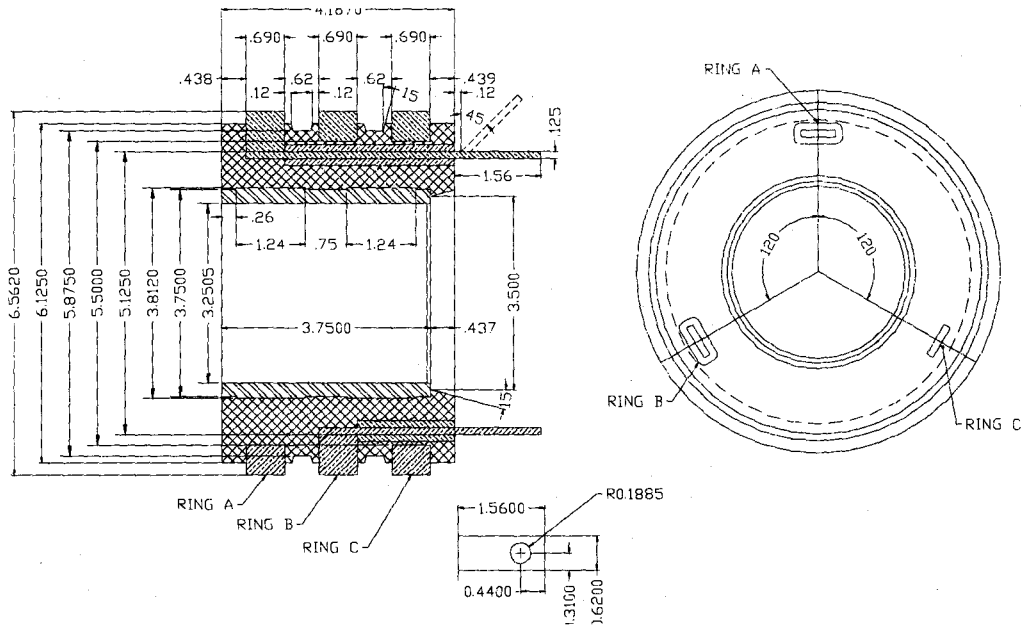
Input Collector (Slip Rings, mounted on Collector Shaft)
